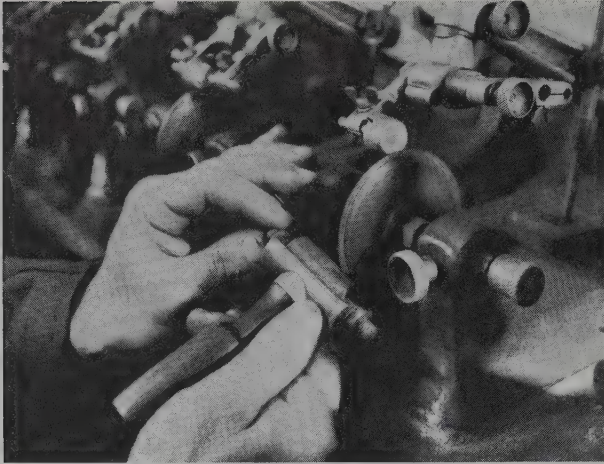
Charging the sawing disc with diamond powder (by courtesy of Shell Petroleum Company Limited)
